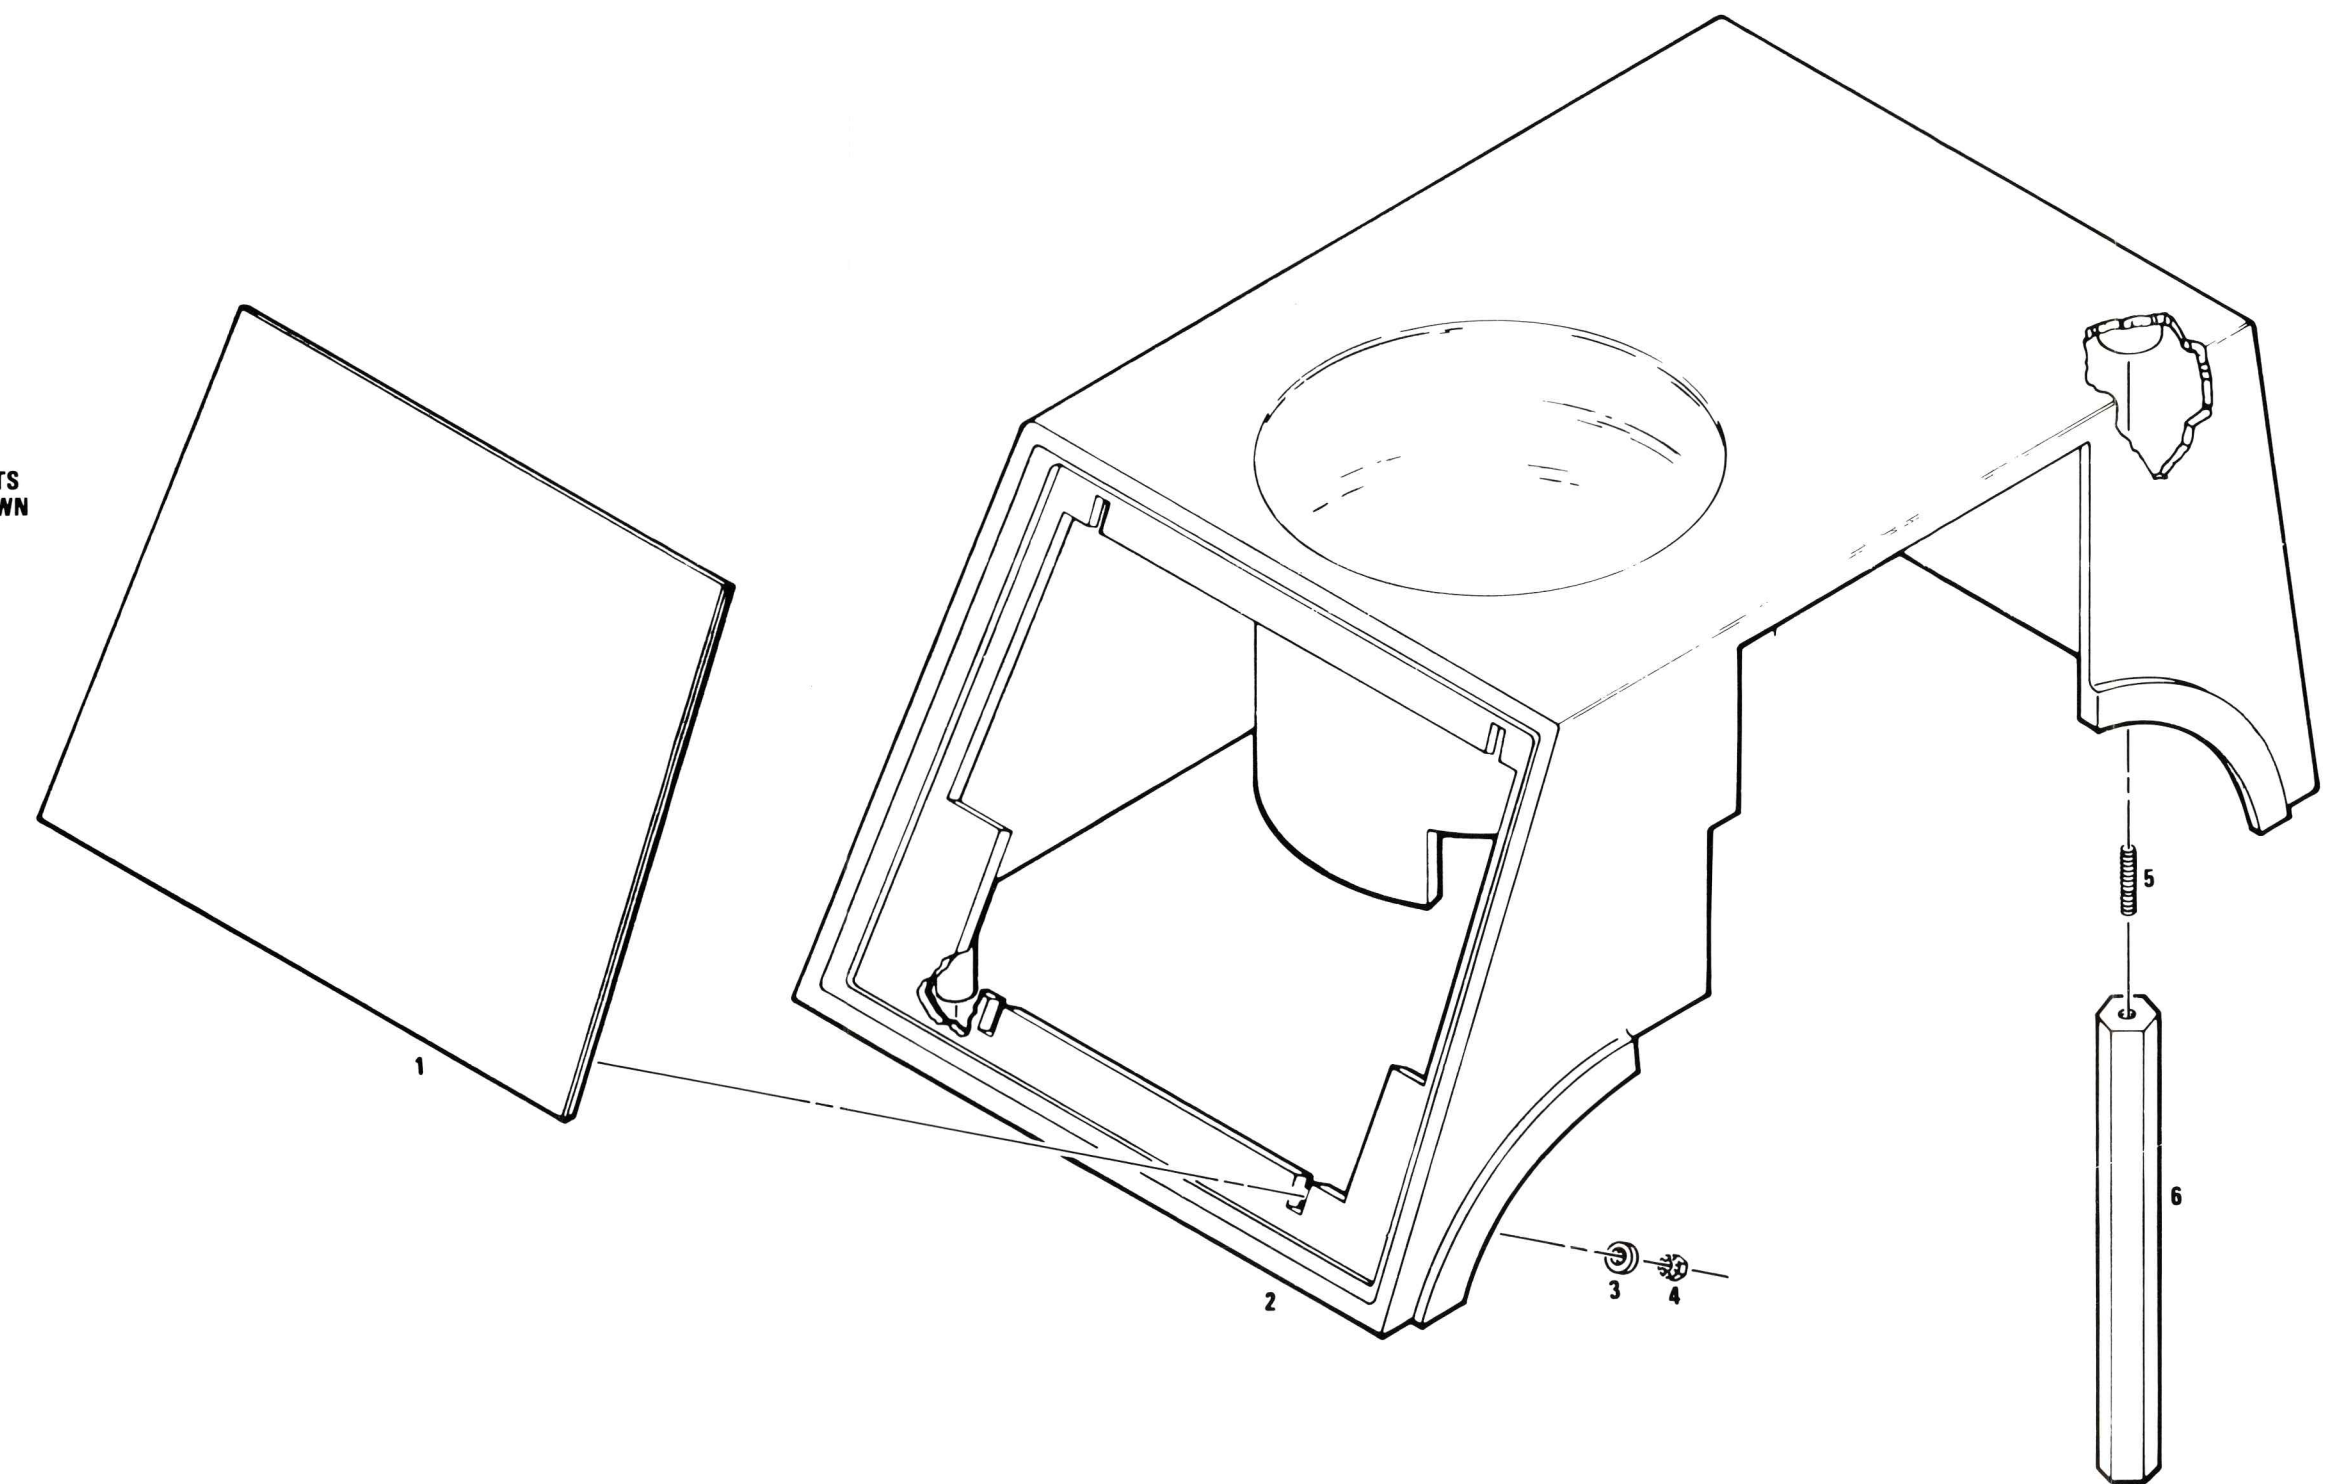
Front Panel and Carousel Cover Assemblies, Illustrated Parts Breakdown
